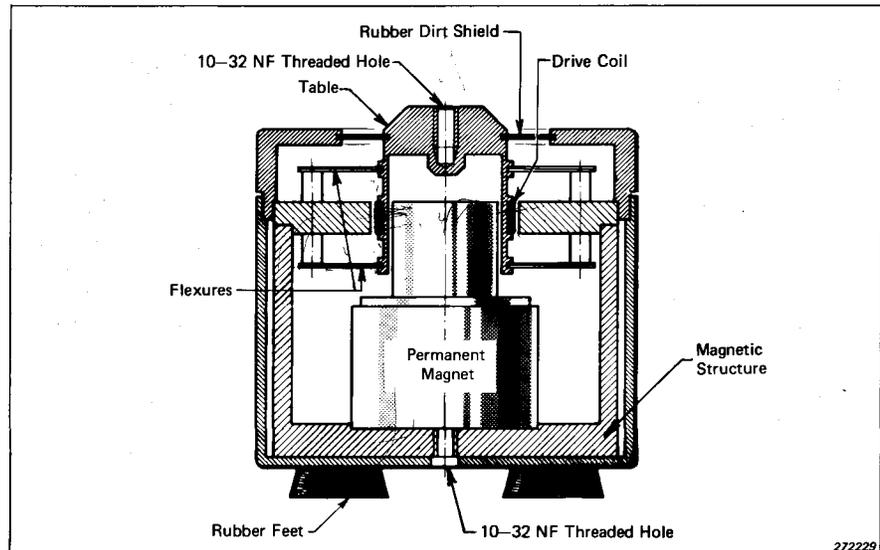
Sectional drawing of the Mini-Shaker Type 4810
